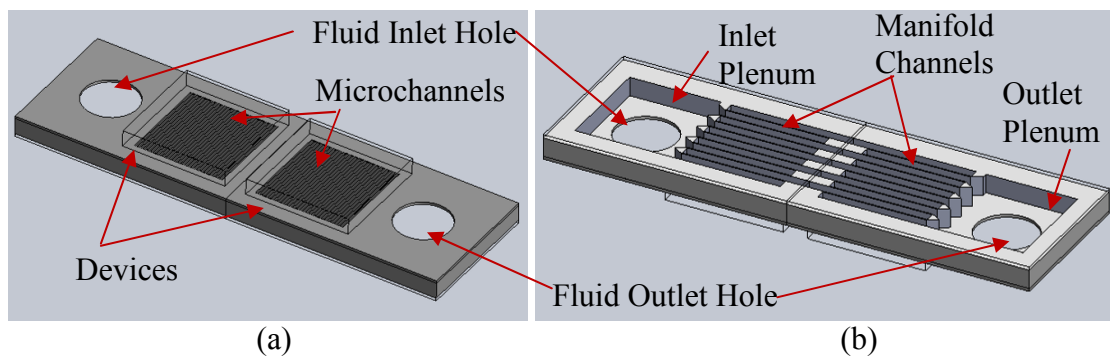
Schematic of MMC3 (a) view from the device side (b) view from the backside
